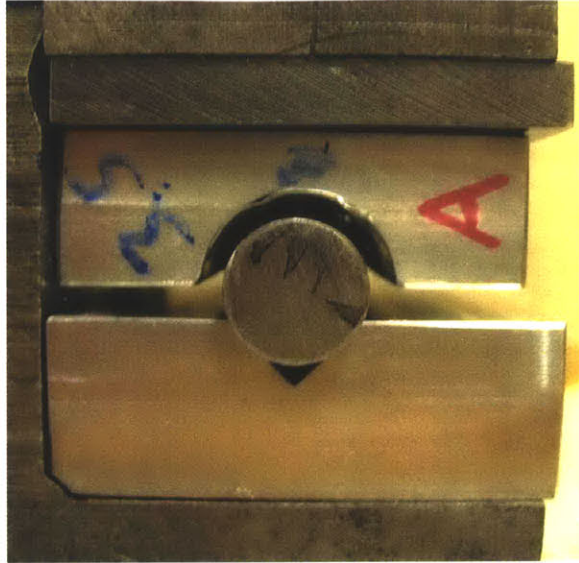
Moulding parts exerting pressure on rubber-metal laminates under curing.
